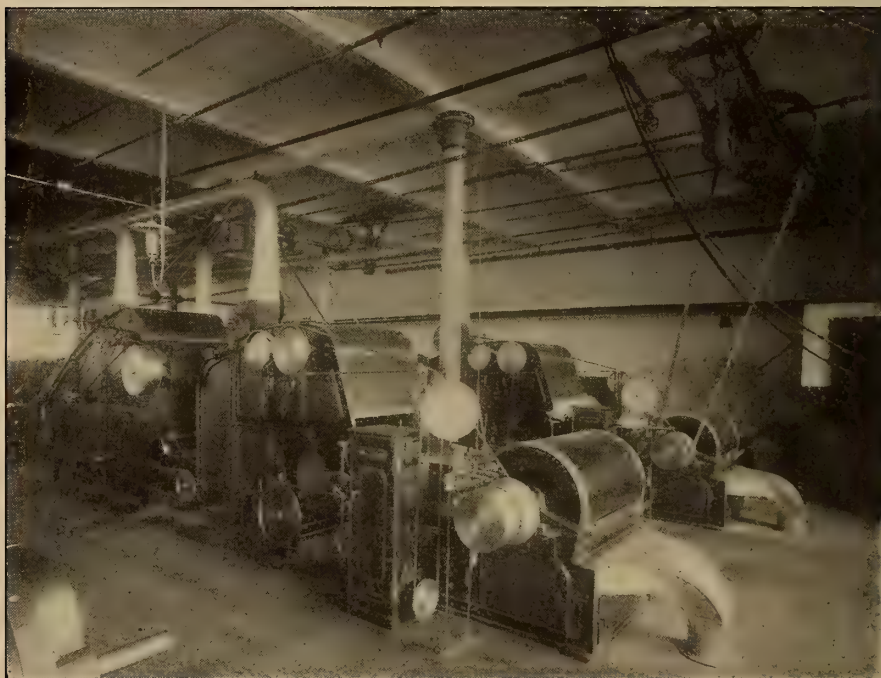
COMBINED BALE BREAKER HOPPER FEEDER AND PORCUPINE OPENER WITH REGULATOR.
